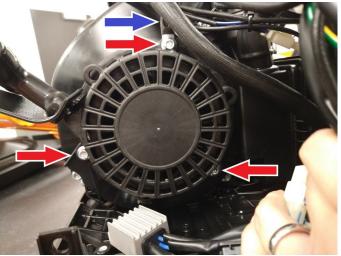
Recoil starter mounting bolts (red); cable clamp (blue).
